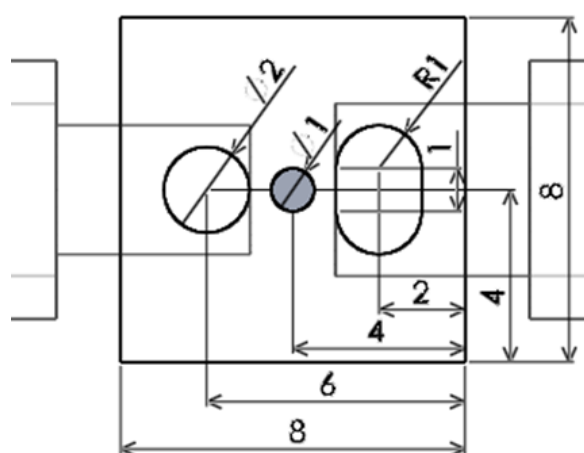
Enlarged view of part A in Fig. 2.9(c)
